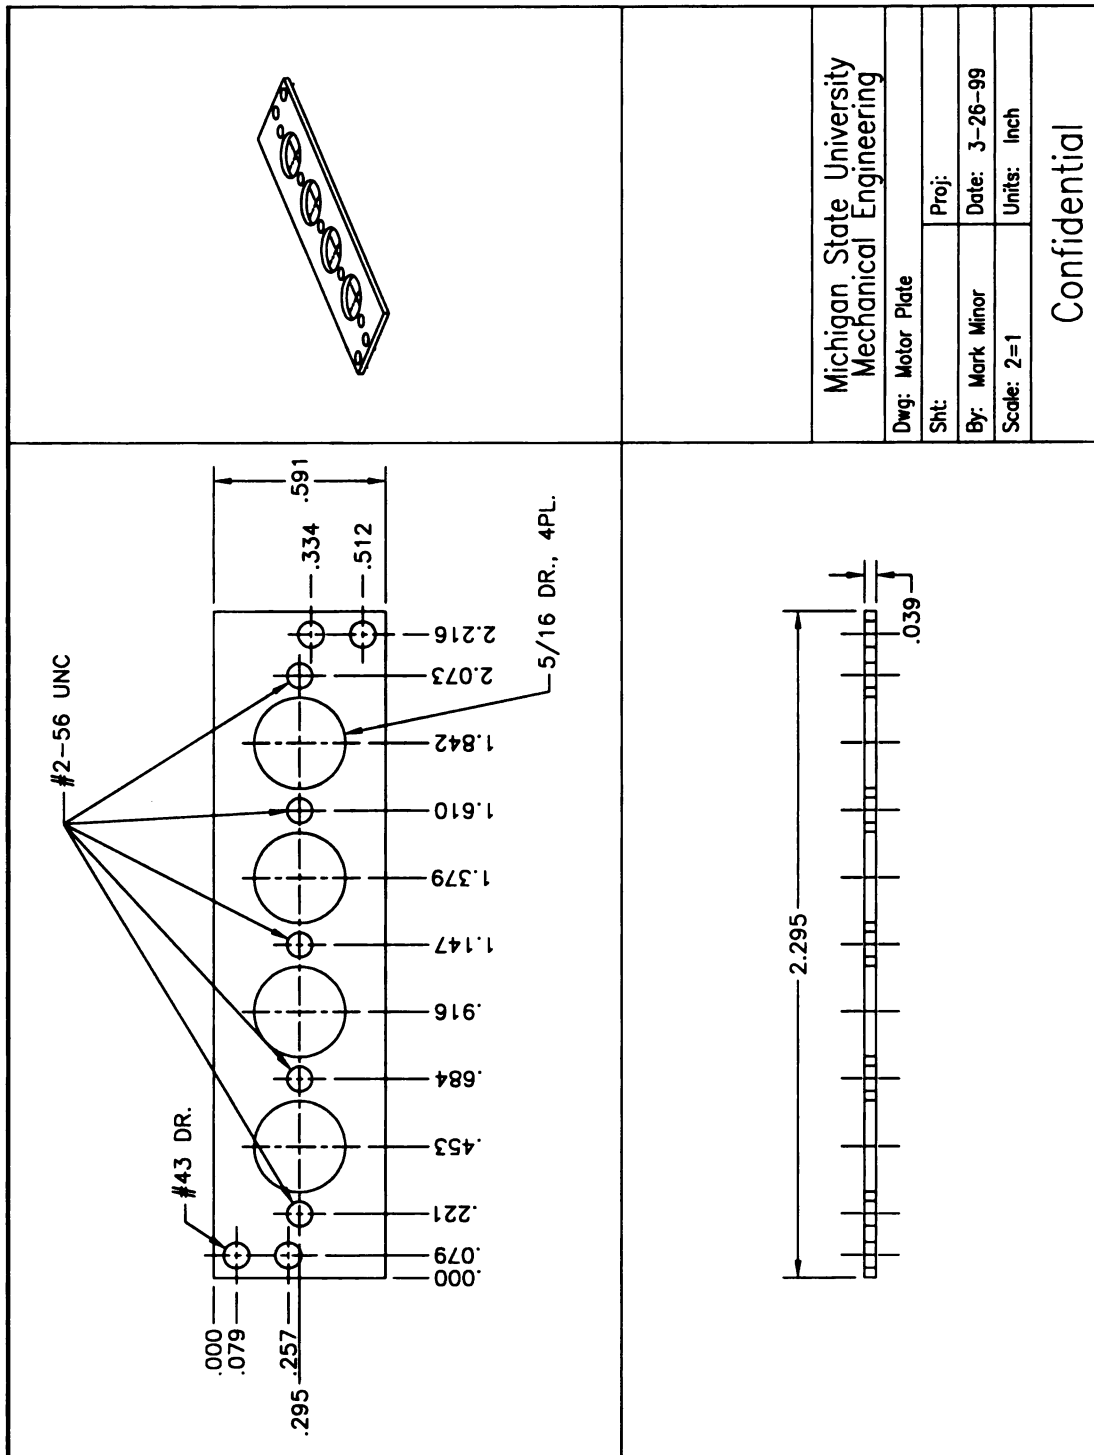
RAMR1 Component: Link 4 Motor Bracket Coupling Plate
